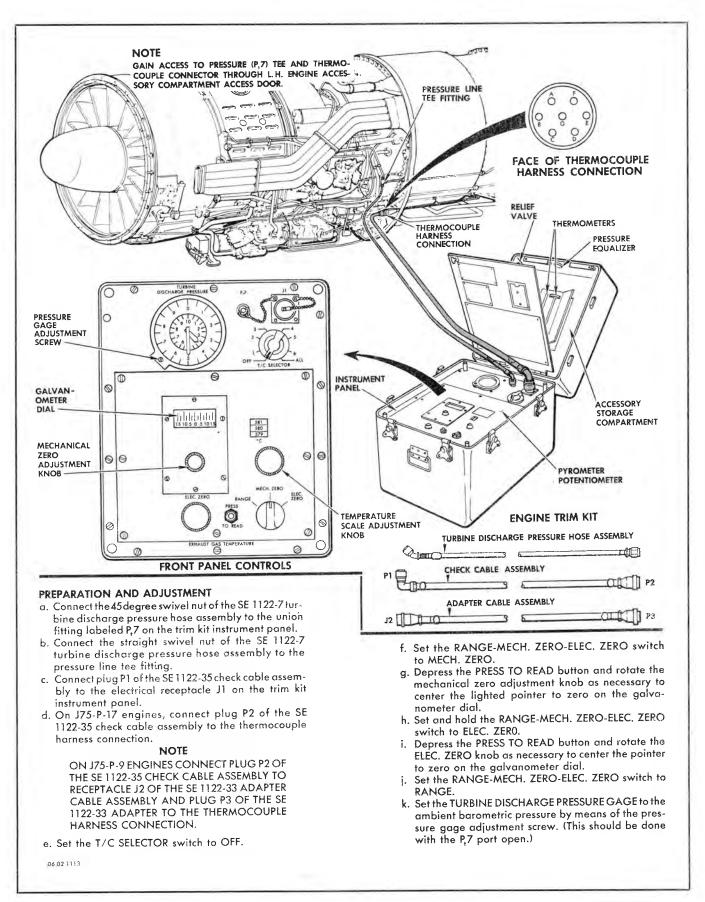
Connecting SE 1122 Engine Trim Kit
